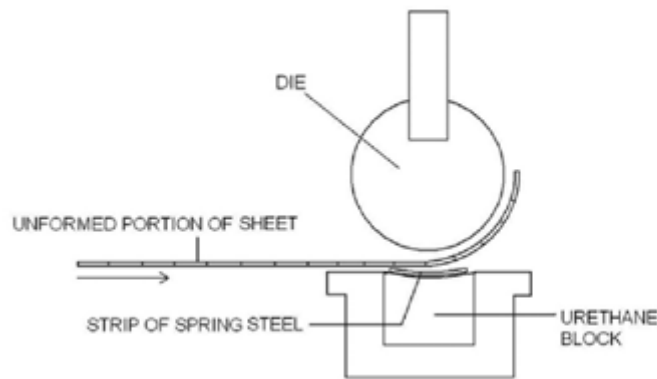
Press brake forming of sheet to make a tubular shape [4.26].
